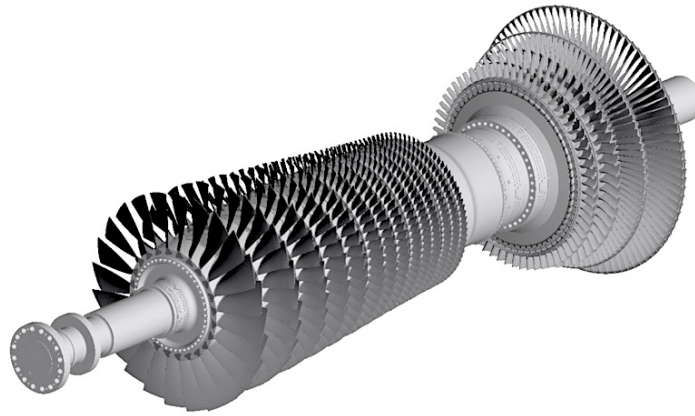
Steam turbine rotor, where the blades form two conical frustum geometries.
